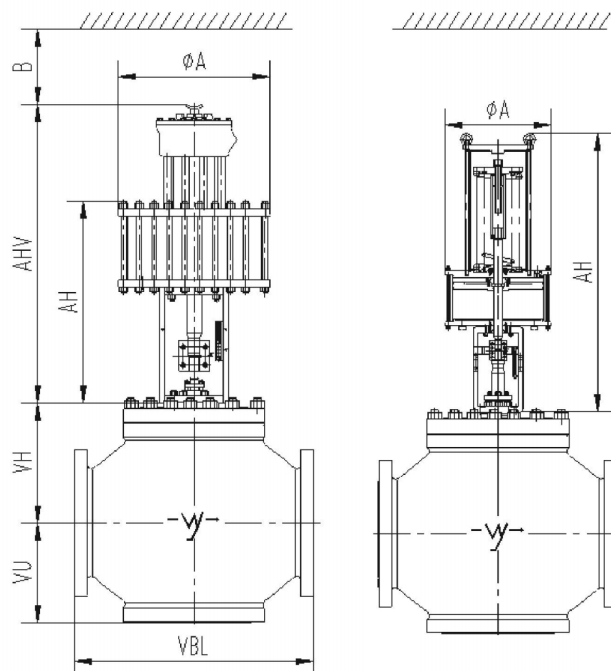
Overall drawing with piston actuator for DN80—DN400 (18"-24")
